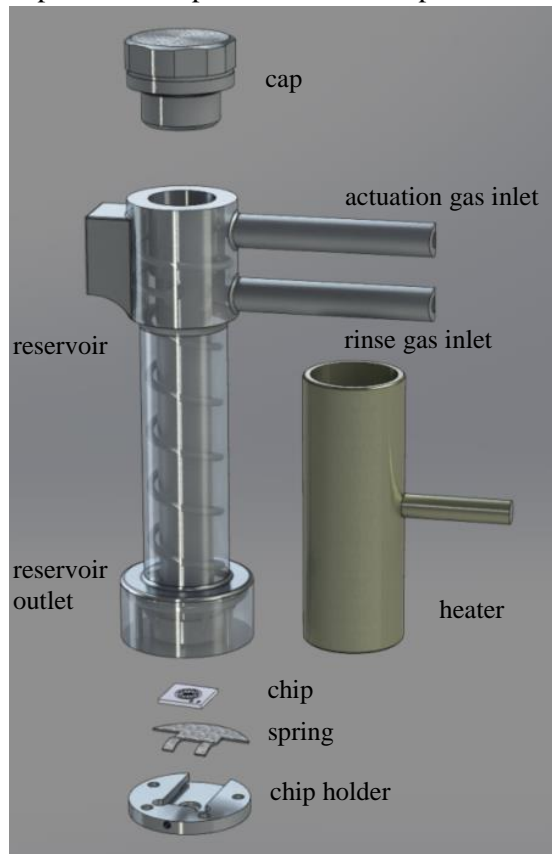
Exploded view of StarJet V3 actuator with integrated heating channels for rinse gas surrounding the reservoir.
